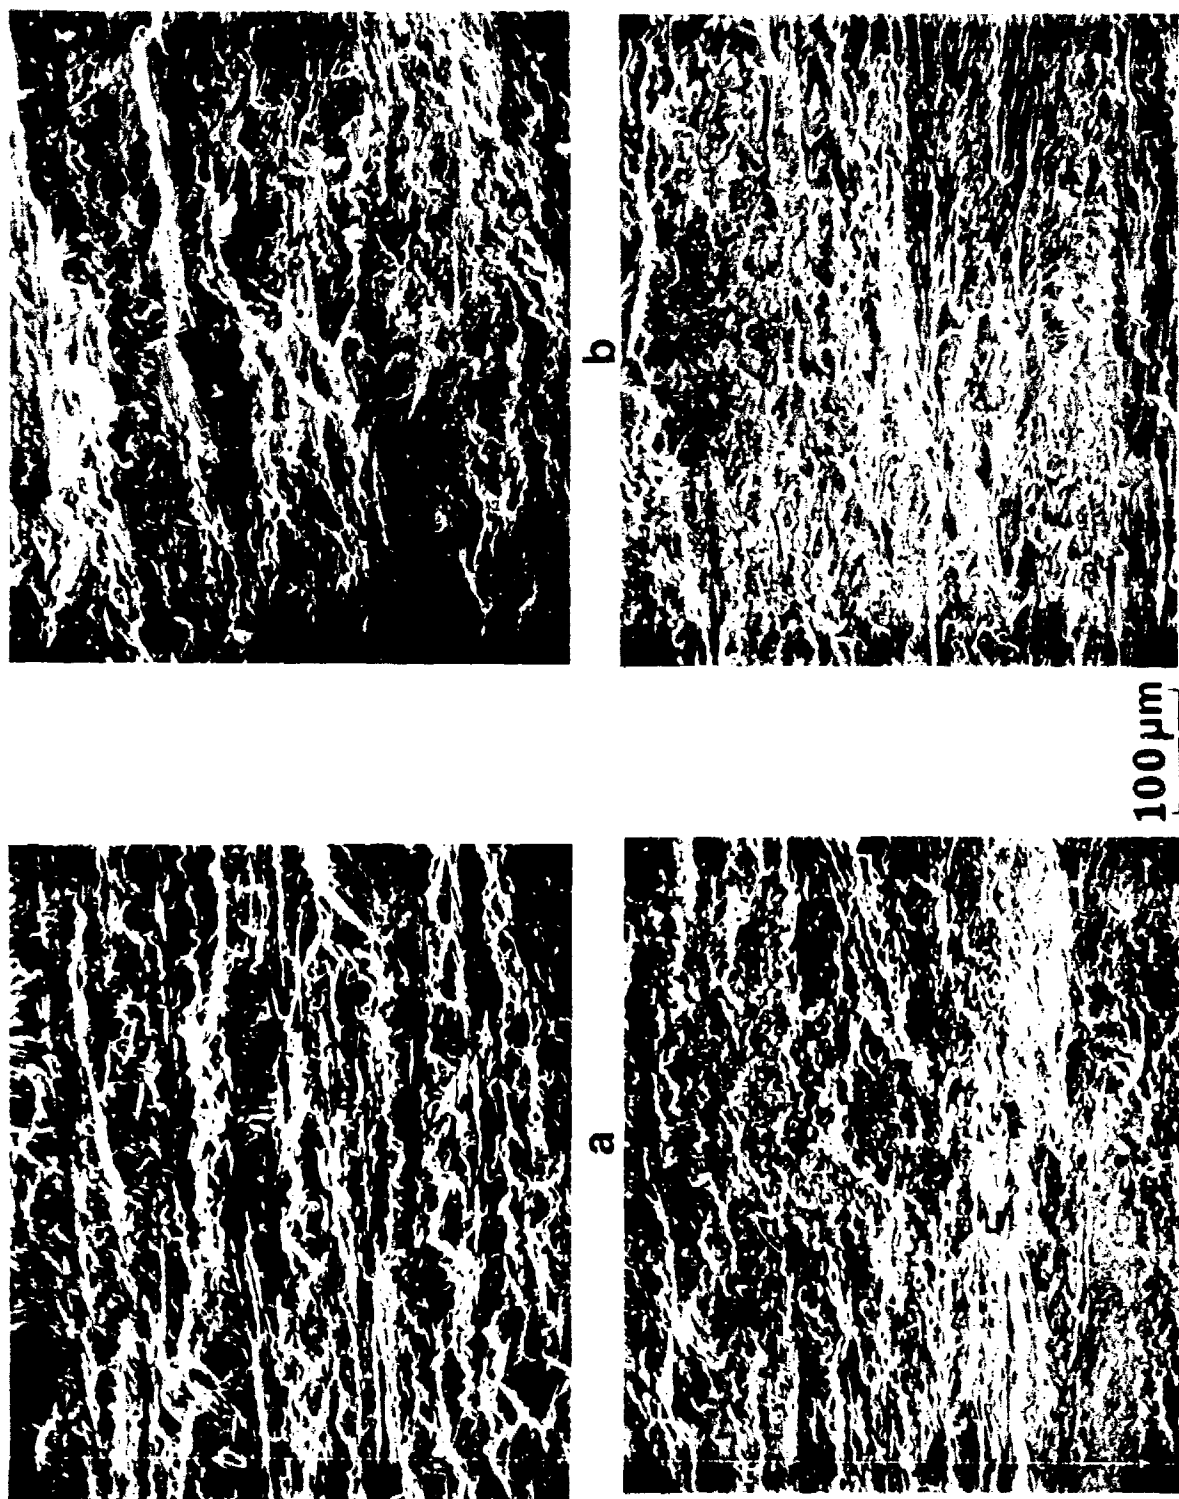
Fracture surfaces at a ΔK of approximately (a) 5, (b) 6.5, (c) 8, and (d) 10 MPa \sqrt{m} of 7050 extruded at high Z, high R.
